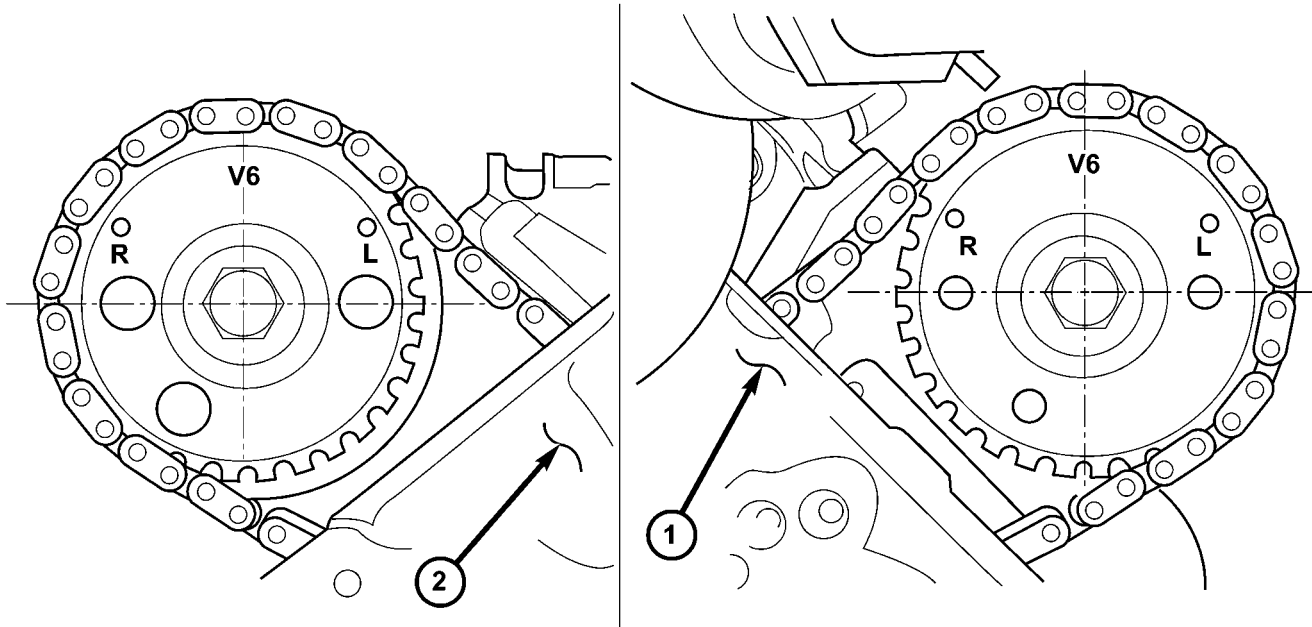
CAMSHAFT DRIVE GEAR REMOVAL/INSTALLATION
